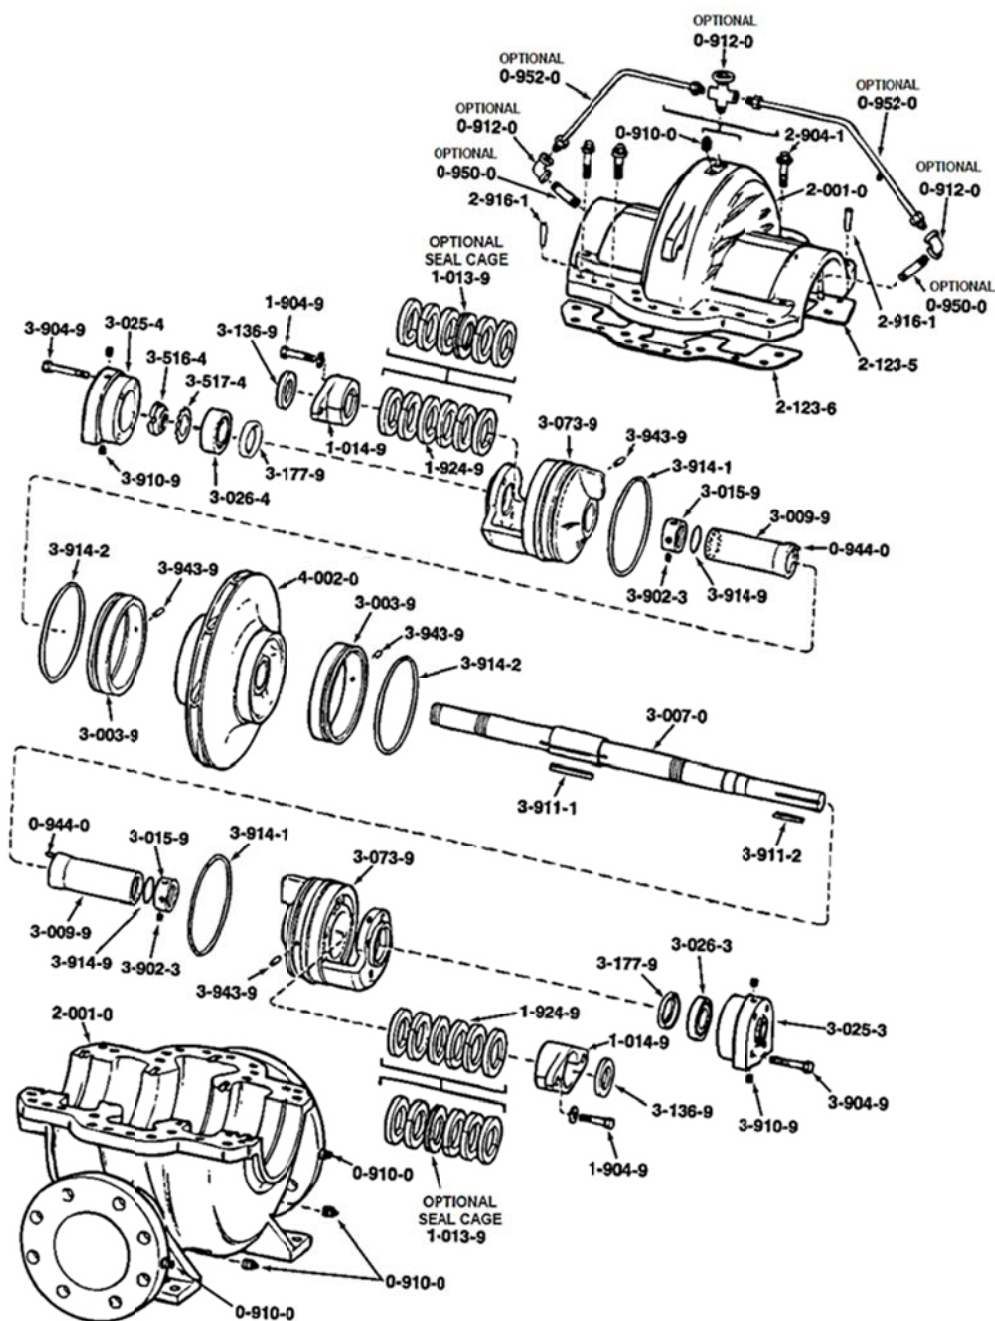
Exploded view of 8100 Horizontal Split Case Fire Pump
